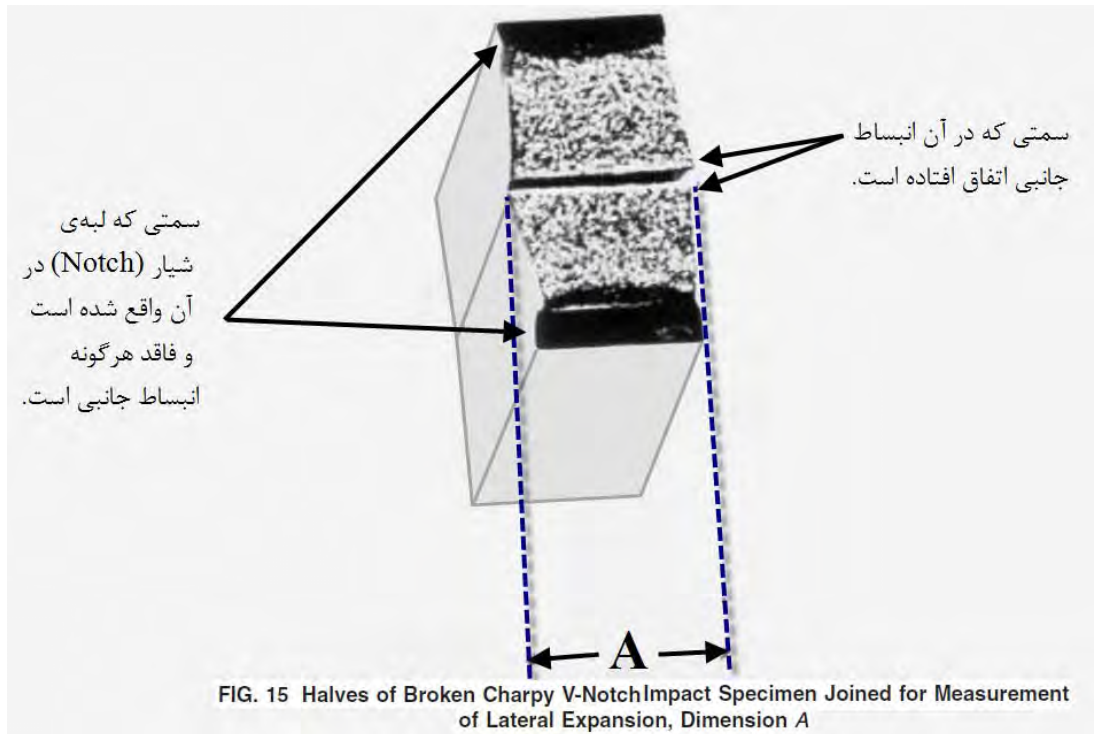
Halves of Broken Charpy V-Notch Impact Specimen Joined for Measurement of Lateral Expansion, Dimension A
